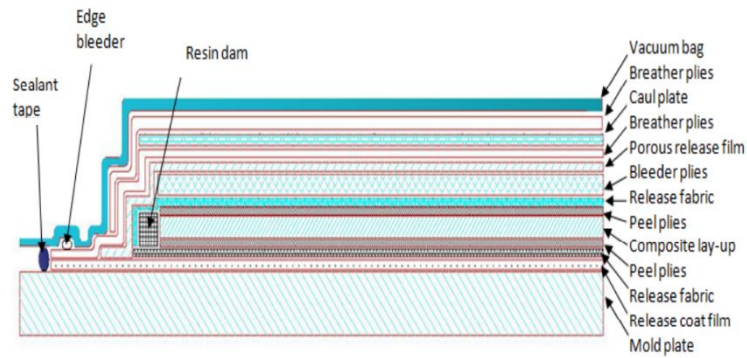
Schematic of a typical bag lay-up molding process [139].
